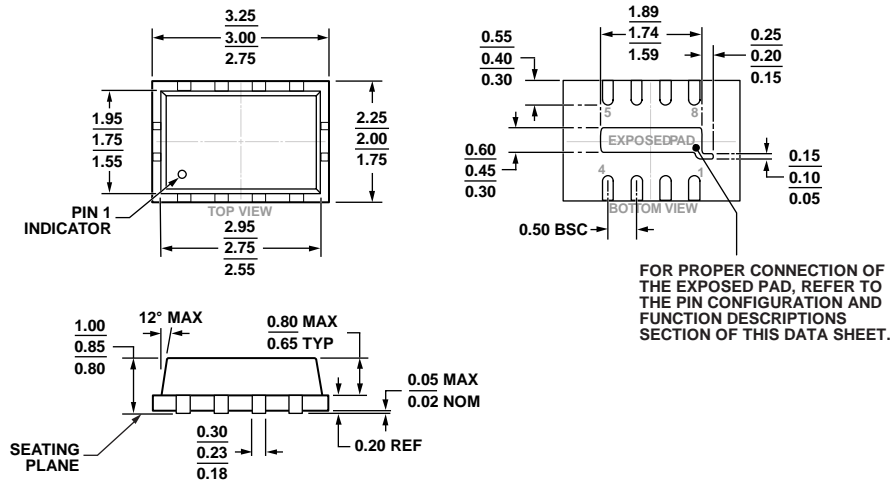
8-Lead Lead Frame Chip Scale Package [LFCSP_VD]
